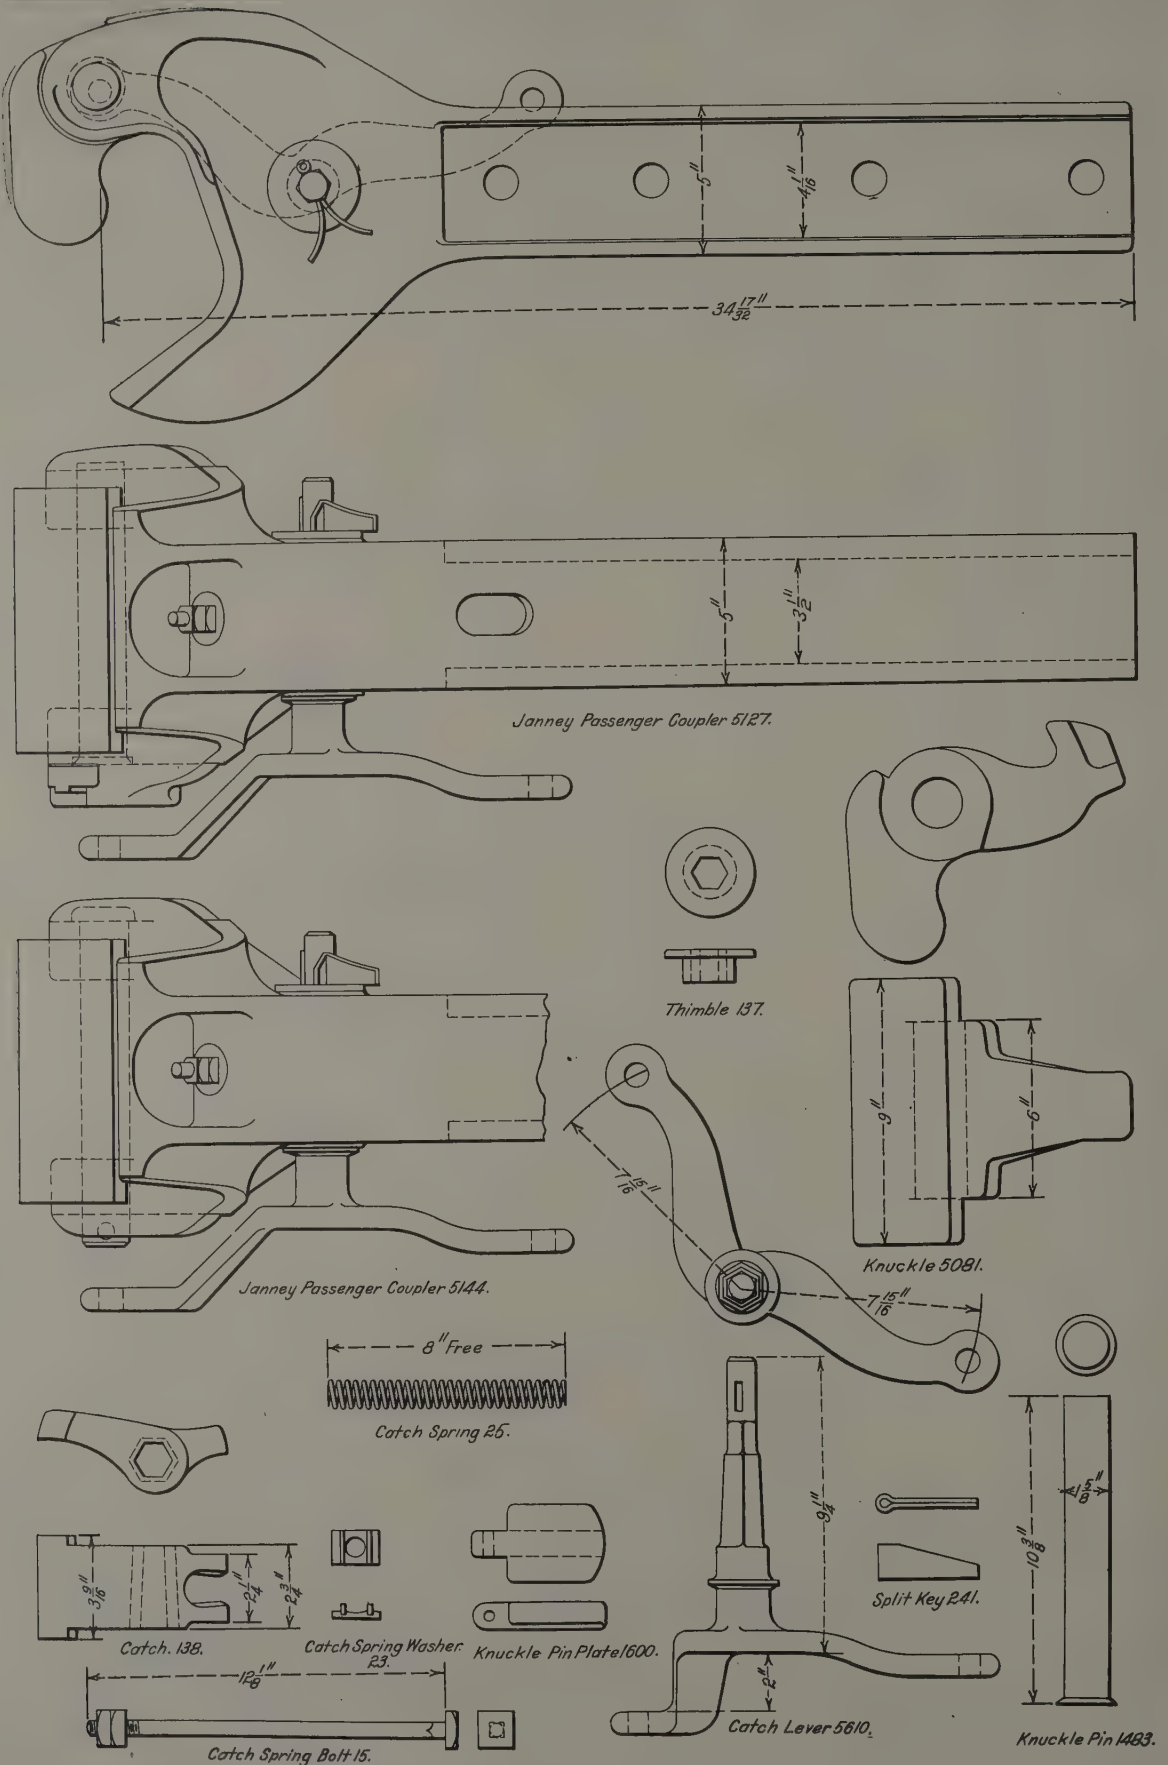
Janney Passenger Couplers and Parts. The McConway & Torley Company.
